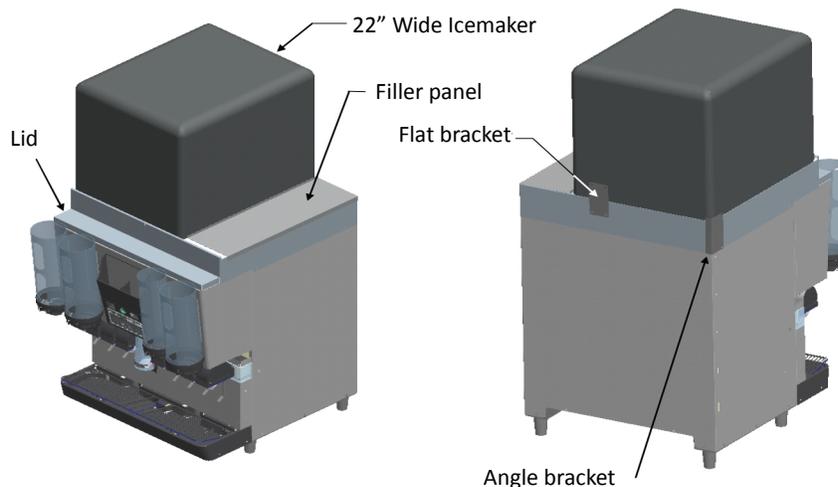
Front and Rear Views of 22" Wide Assembled Unit
